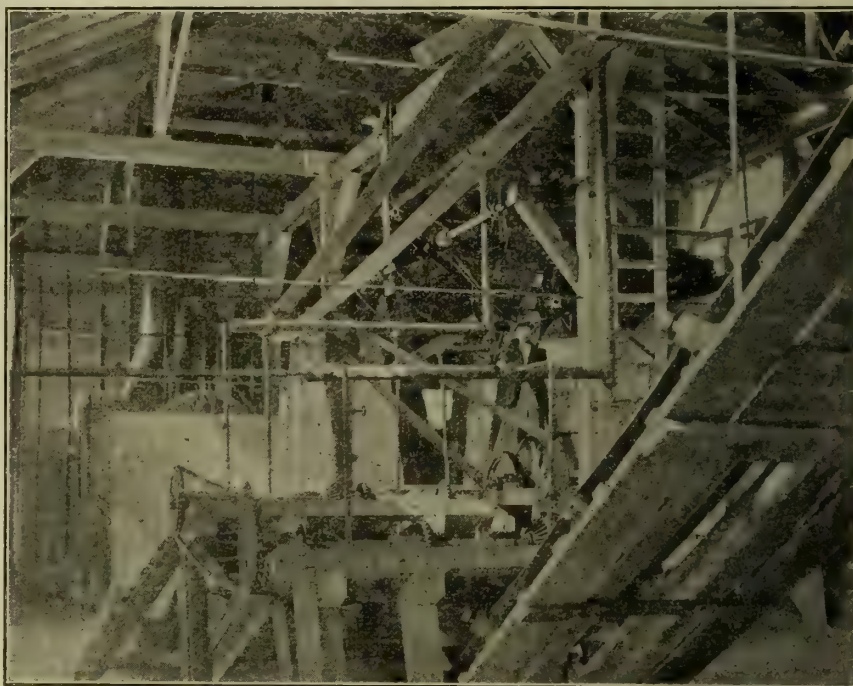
Corner in Mill, Showing Rear of Boiler, Mashers, Screens, Grinding Pan, Sand Conveyors, Etc.
